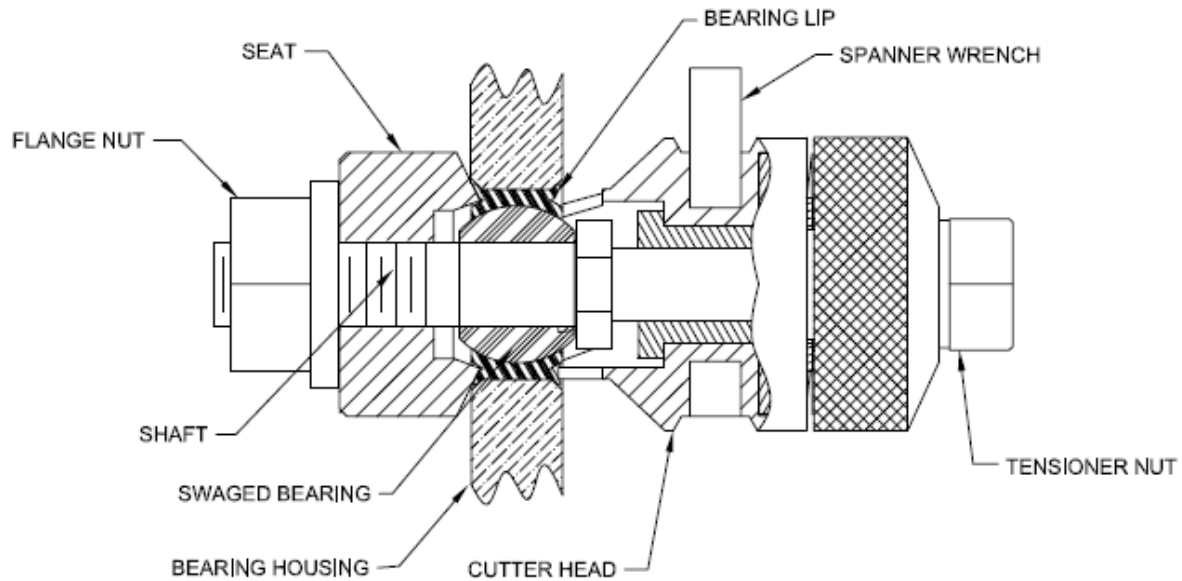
RBIR## BEARING INSTALL & REMOVAL TOOL:
